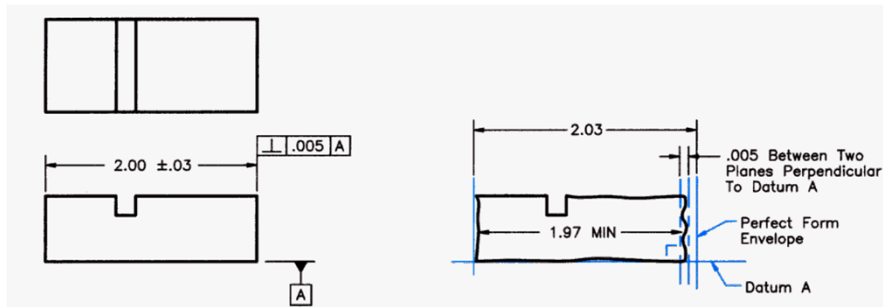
The tolerance zone for a perpendicularity tolerance on a flat surface is bounded by two planes.
